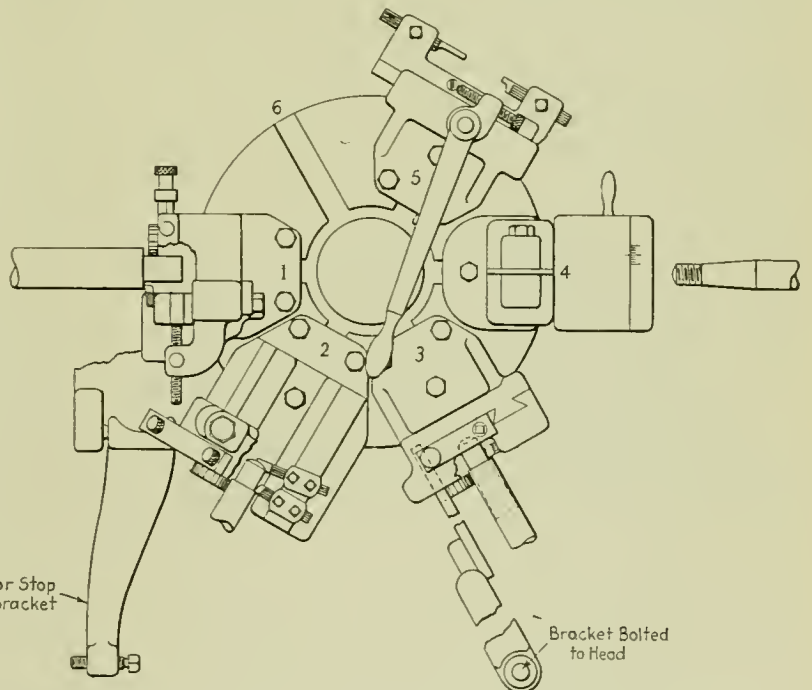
Tooling of Hand Screw Machine for Making Prosser Flue Expander
